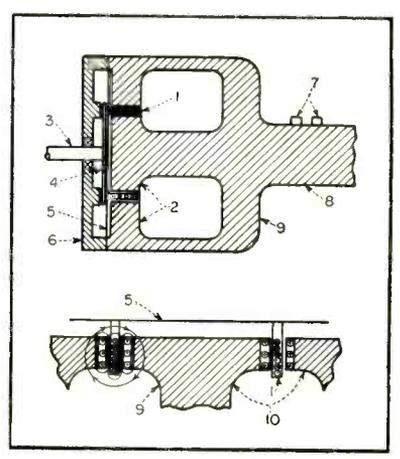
Cross-sectional view of loud-speaker type clutch showing (1) actuating coil, (2) magnetic poles, (3) output shaft, (4) output disk, (5) flexible diaphragm, (6) backing disk, (7) slip rings for actuating current, (8) input shaft, (9) magnetic structure, (10) compensating coils. Lower diagram shows placement and action of compensating coils
